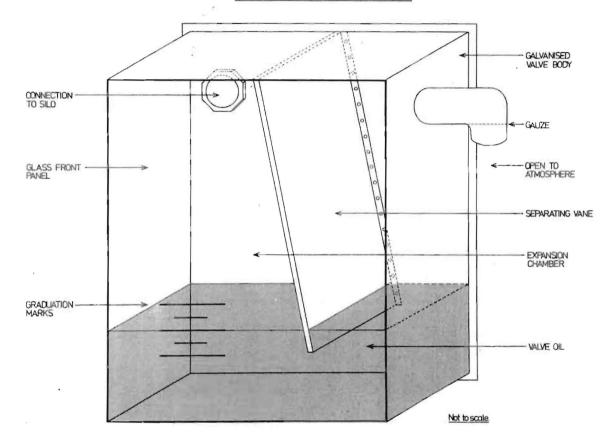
Design of an oil-filled pressure relief valve for a farm bin.
